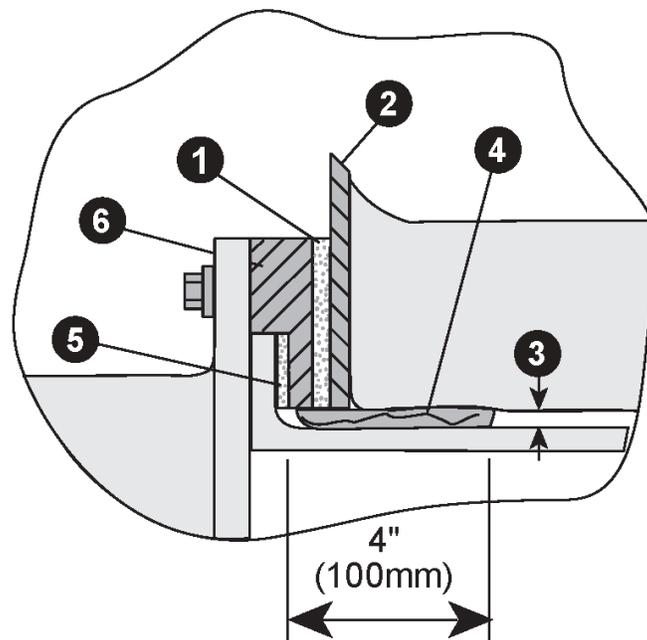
Silicon Carbide Combustor Mounted to Furnace Chamber
